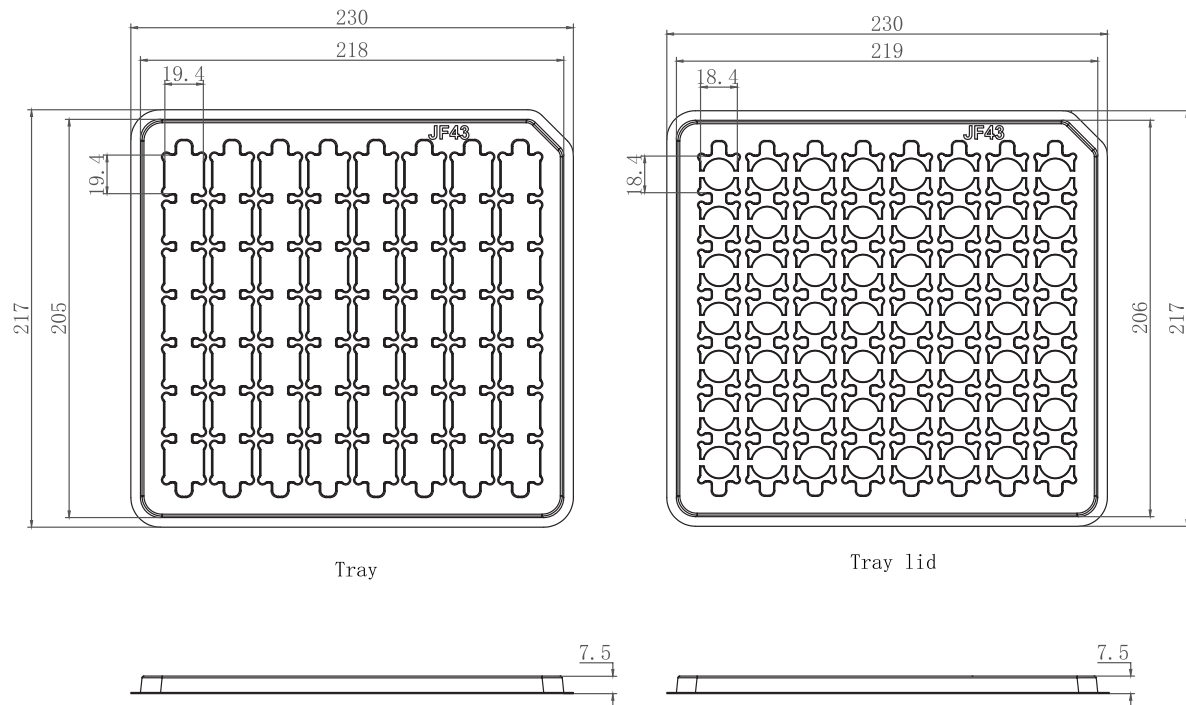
Tray dimensions for L2C4-xxxxxL04F1200, L2C4-xxxxxL05F1200, and L2C4-xxxxxL08F1400.
